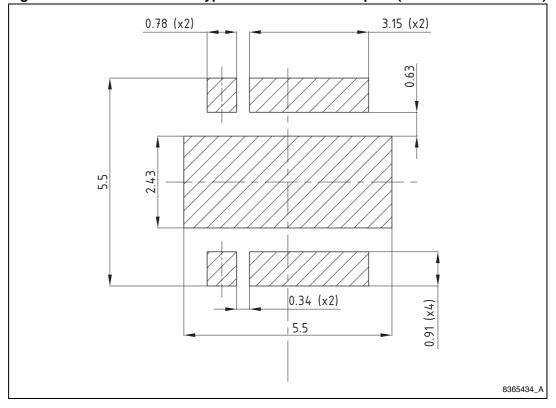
PowerFLAT[™] 5x5 type S recommended footprint (dimensions are in mm)
